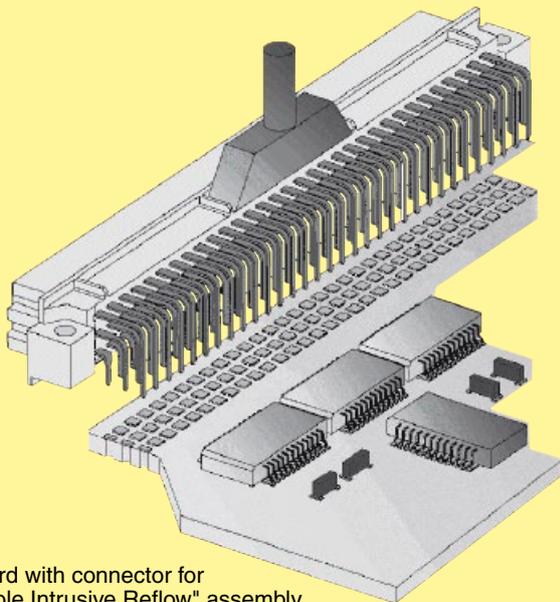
SMT board with connector for "Pin in Hole Intrusive Reflow" assembly
